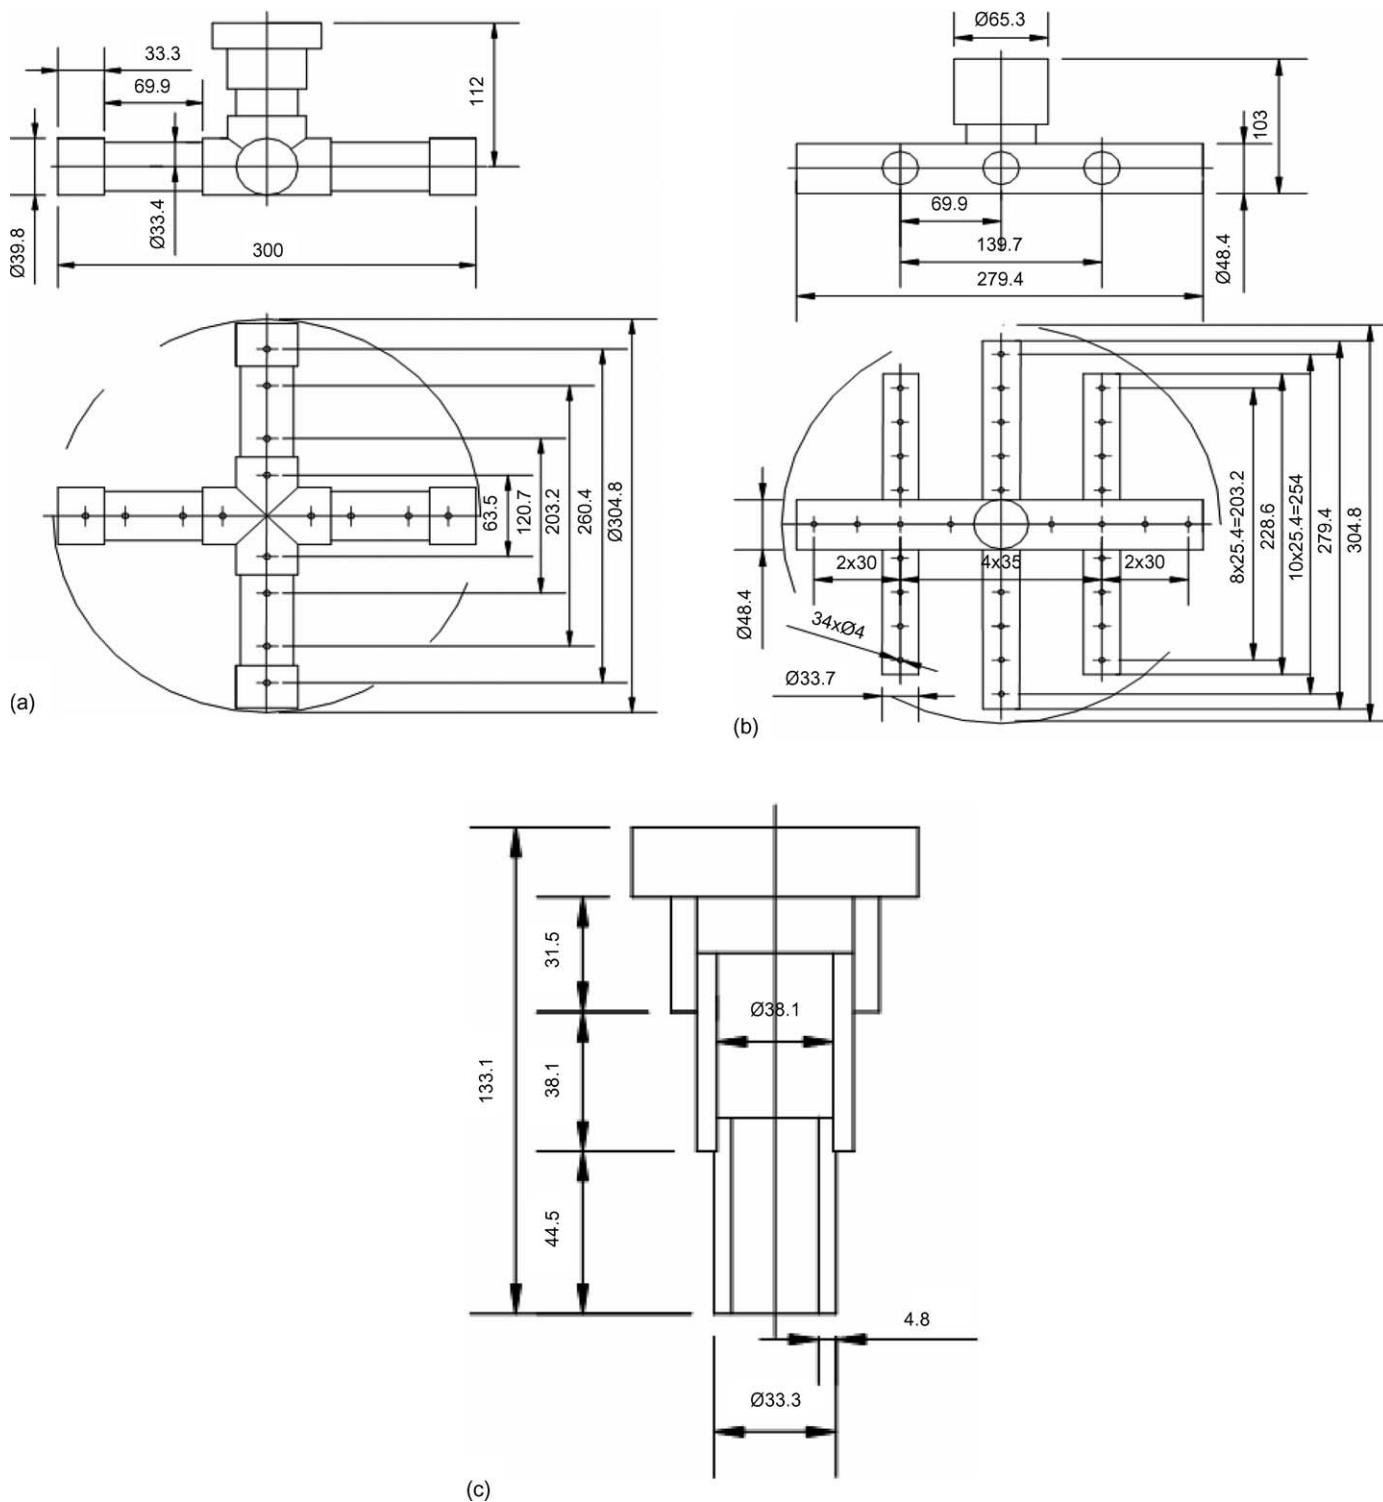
(a) Side view (top) and lay-out (bottom) of cross-type liquid distributor (CLD). All dimensions are in millimeter. (b) Side view (top) and lay-out (bottom) of ladder-type liquid distributor (LLD). All dimensions are in millimeter. (c) Lay-out of single-point liquid distributor (SLD). All dimensions are in millimeter.
